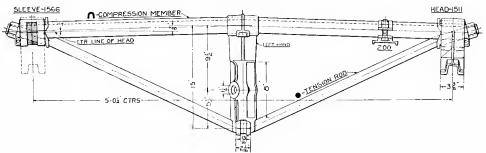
Creco Double Brake Beam for Four-Wheel Passenger Trucks.
